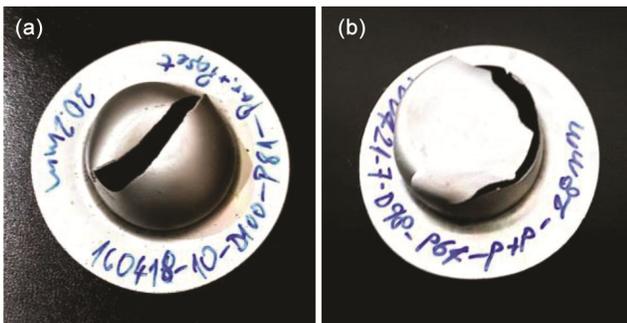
Failed parts where rupture occurs before completion of forming, a) Thickness 1 mm, work piece diameter 100 mm, punch diameter 50 mm, drawing height 30, 2 mm, and b) Thickness 1 mm, work piece diameter 98 mm, punch diameter 50 mm, drawing height 28 mm.
